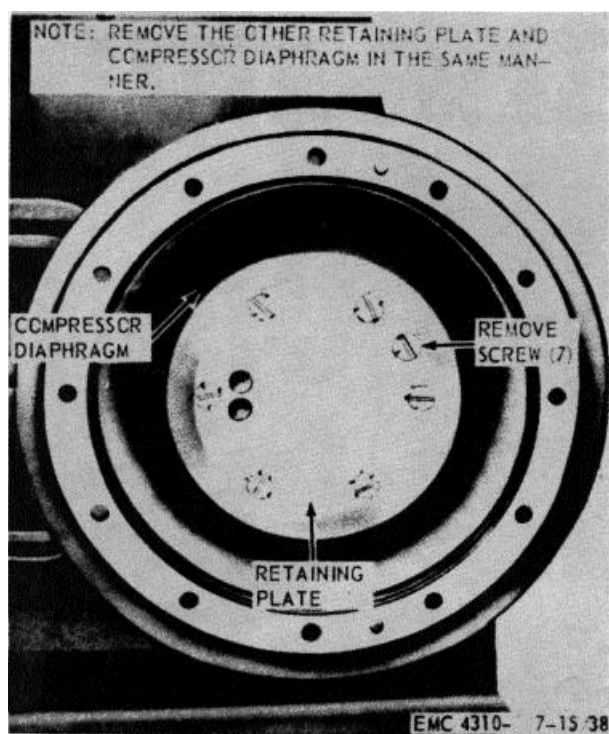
Compressor diaphragms and retaining plates, removal and installation
